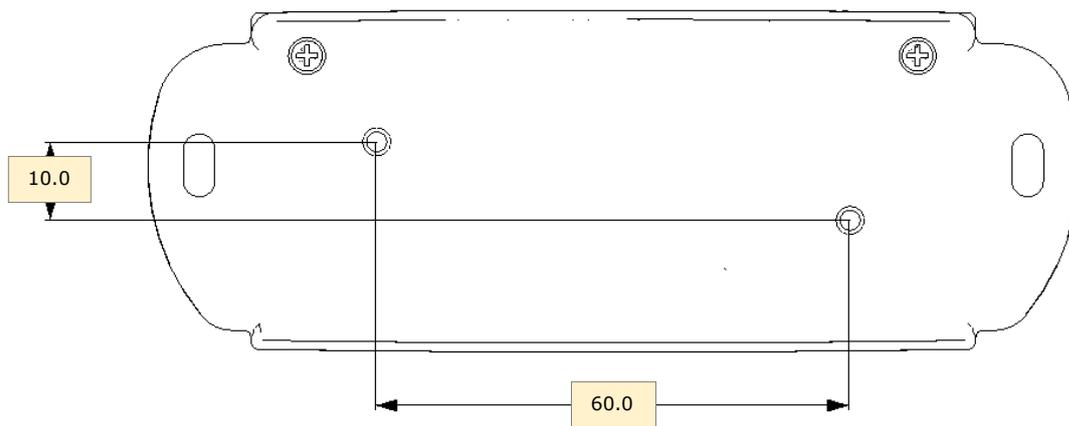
LDSBUS Thermocouple Sensor Adapter Dimension – Bottom View
